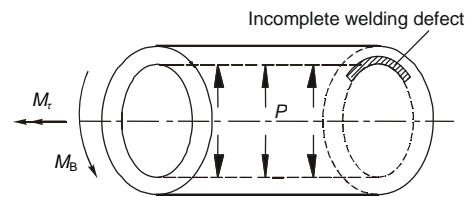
Actual loading model of pipe with incomplete welding defects
